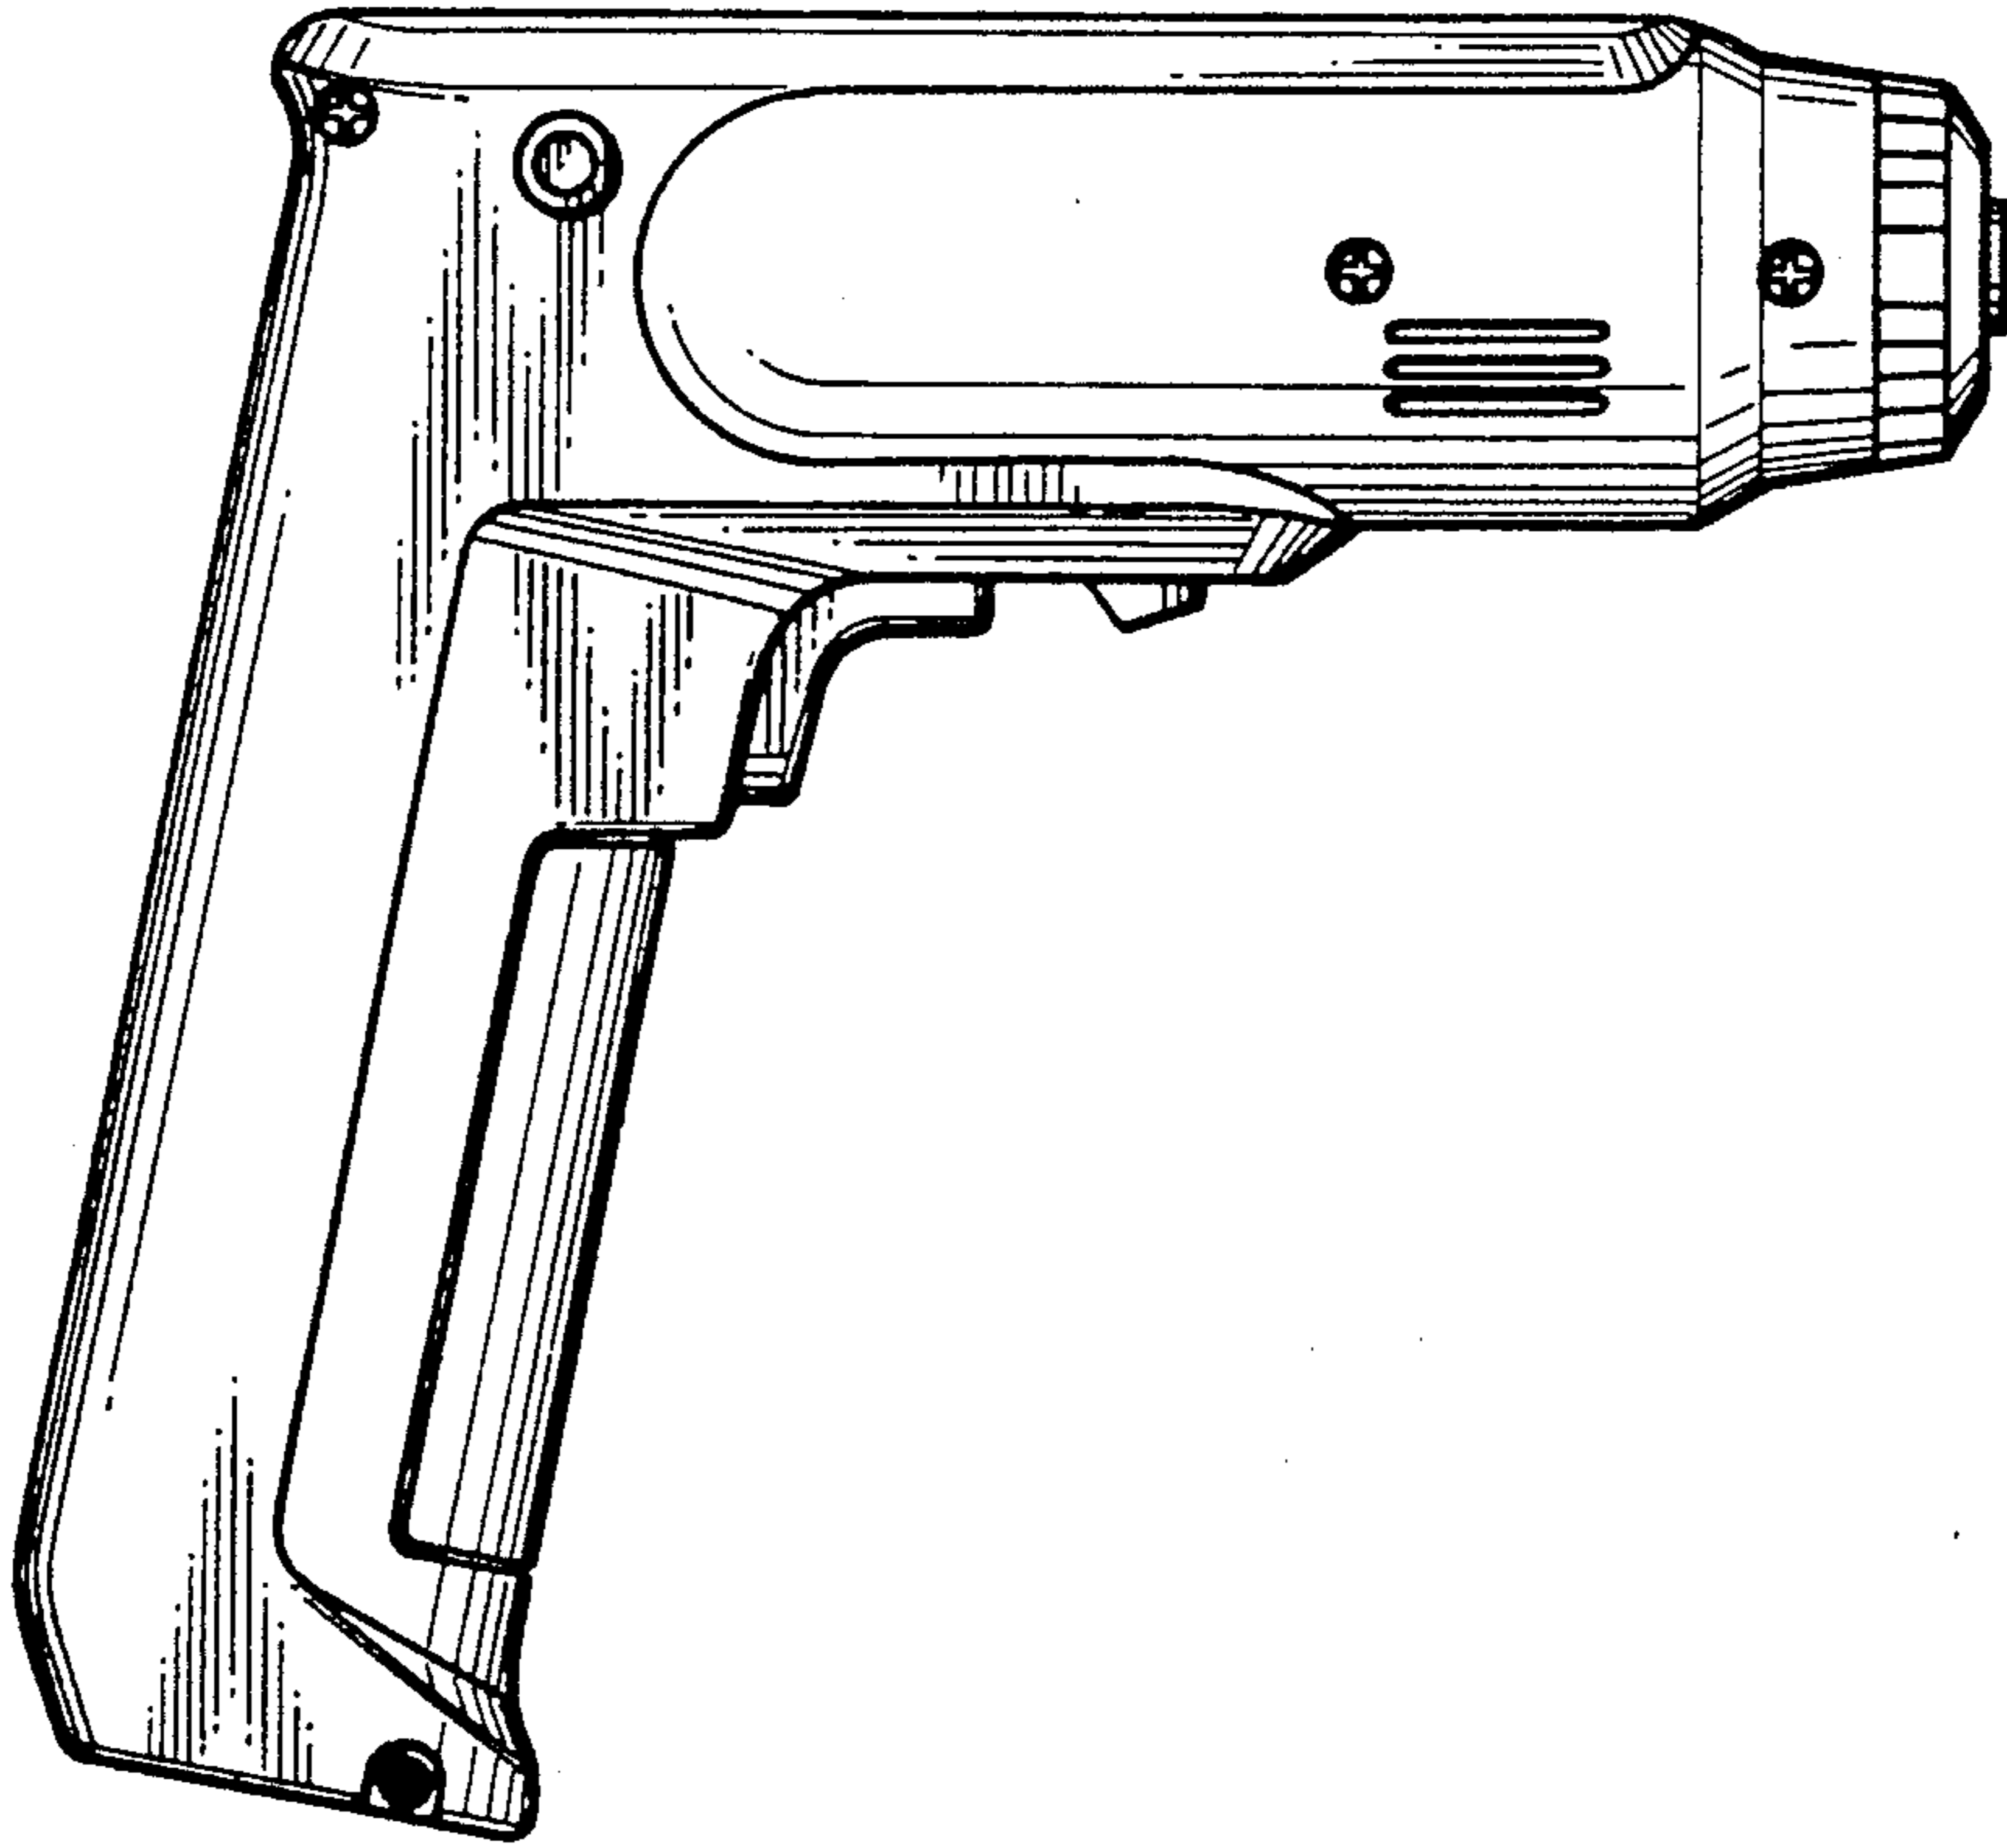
is a right side elevational view of a portable electric driver showing our new design;
